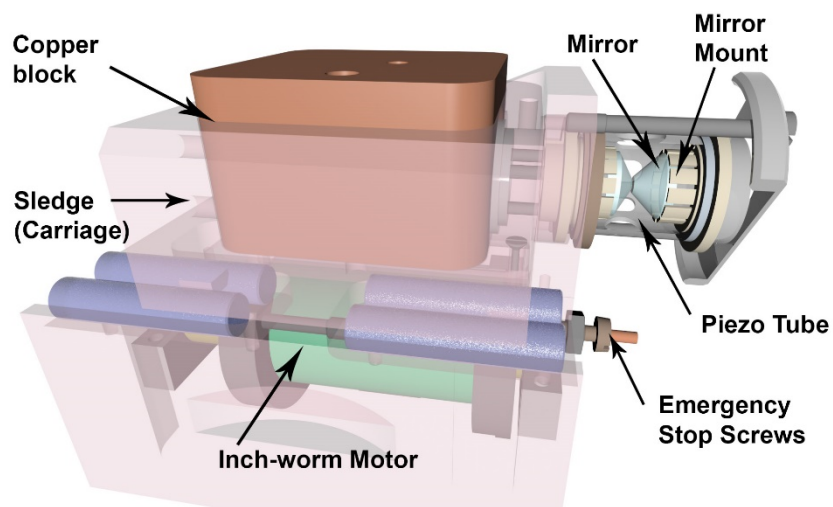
CAD drawing of the inch-worm motor. The sledge containing a copper block slides over four mated glass cylinders moving one of the mirrors macroscopically. The glass rods are made of ULE (ultra-low expansion) glass. The other mirror is fine-tuned with a piezo. Both mirrors are held by clamping into a mirror mount.
